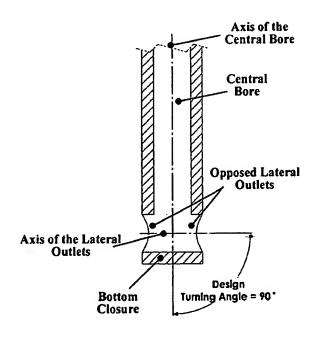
Section View of a Casting Nozzle with Design Turning Angle of 90 Degrees
